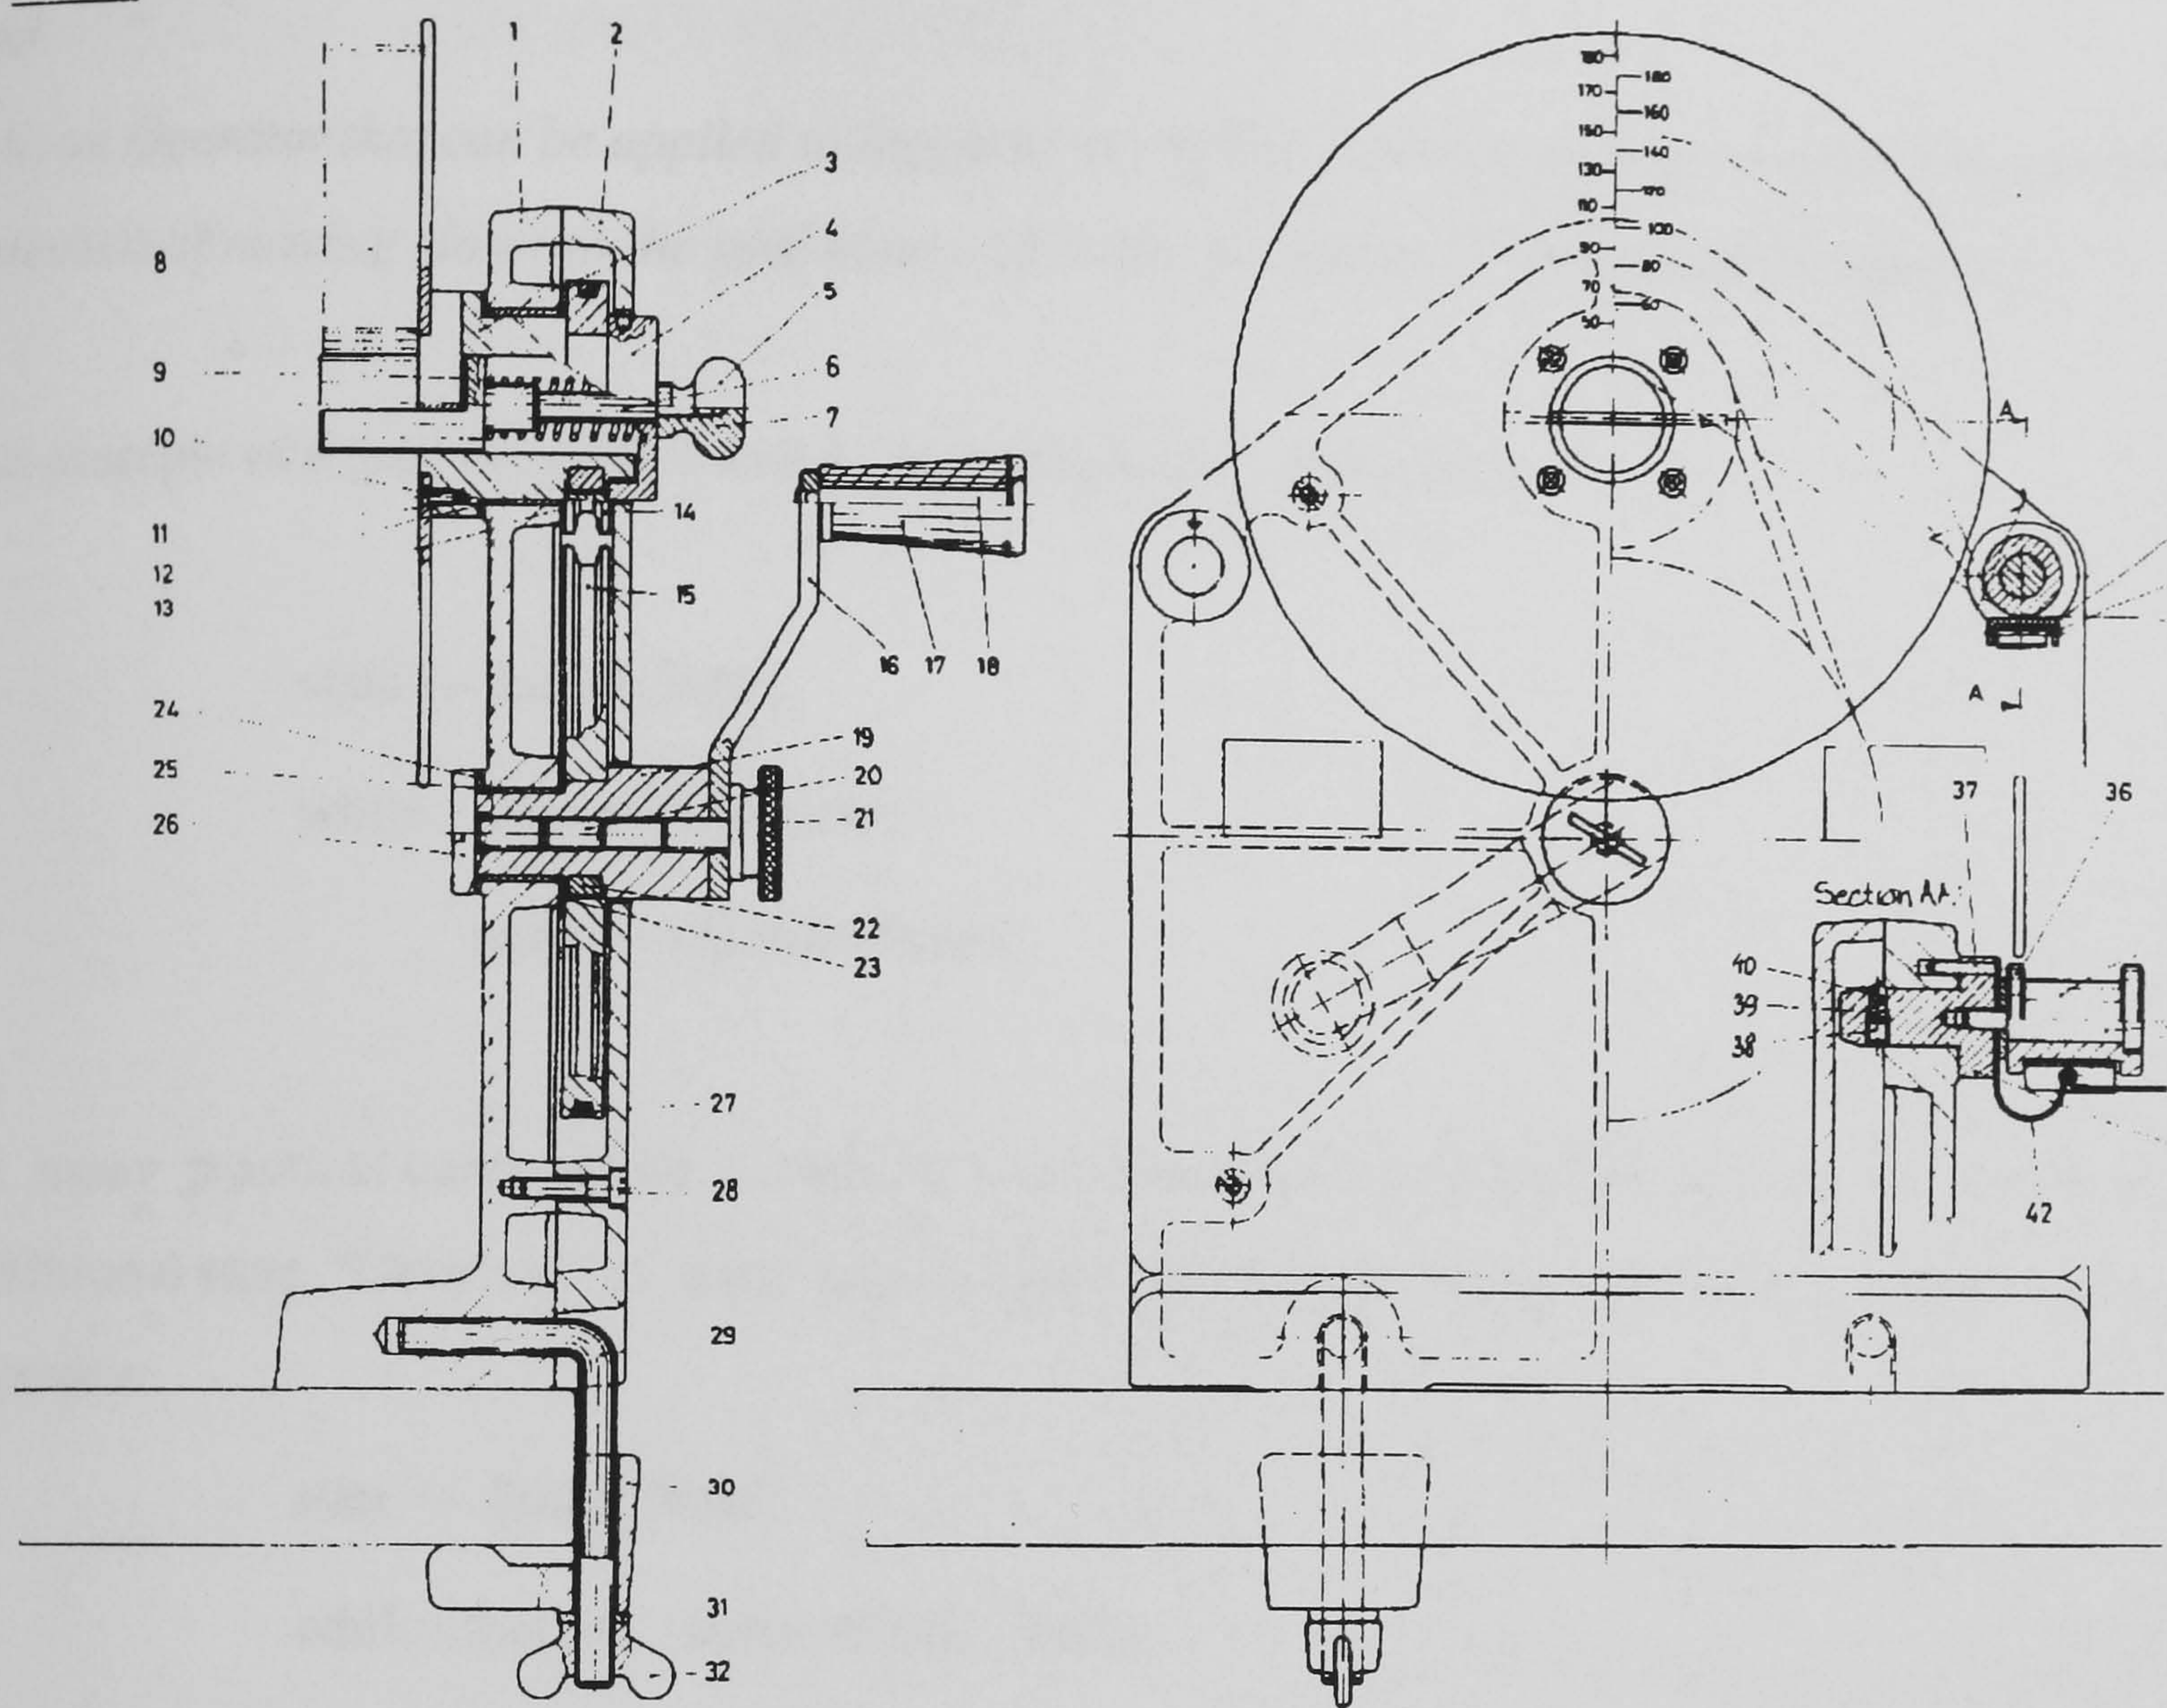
Detailed Dimensional Drawing for Punched Tape Winder (Hubka et al, 1988 : 86)
